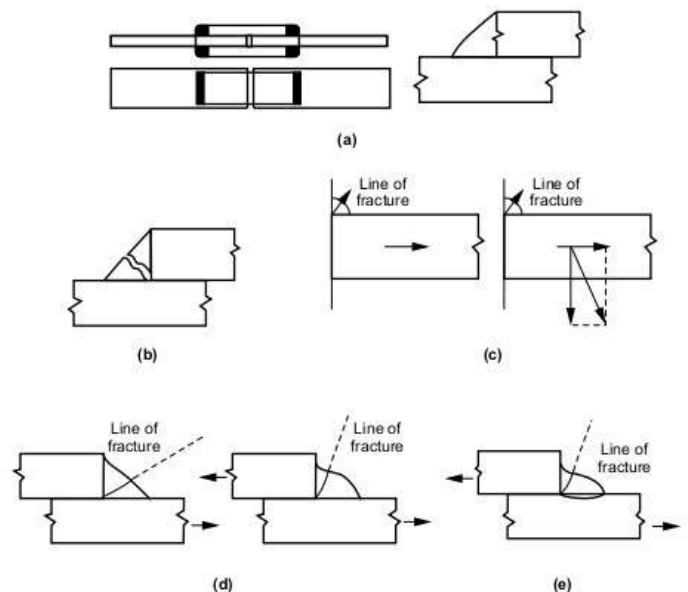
Fracture position in end fillet weld
